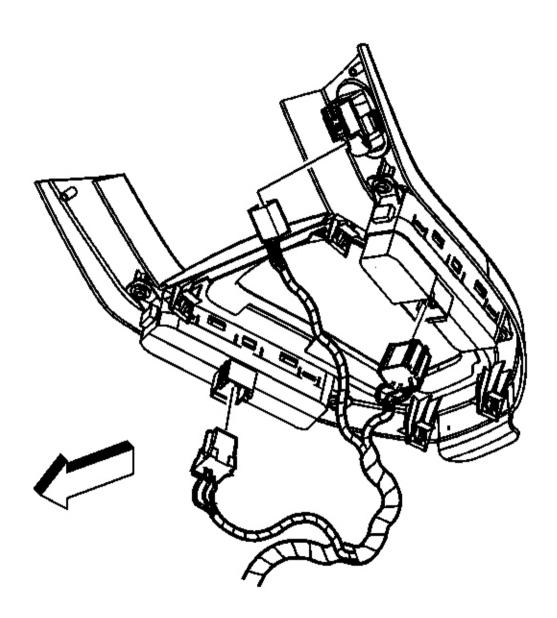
Electrical Connectors & Window Switch Trim Bezel Courtesy of GENERAL MOTORS CORP.
